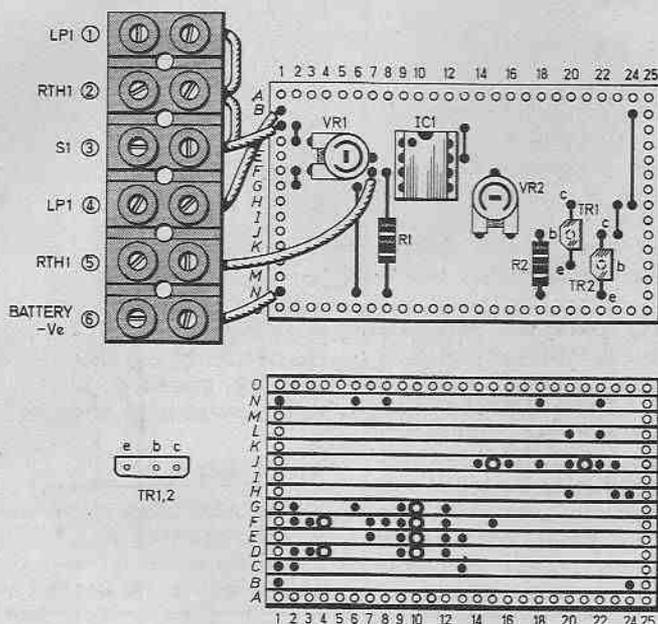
Stripboard layout, also showing the breaks to be made and other wiring.
